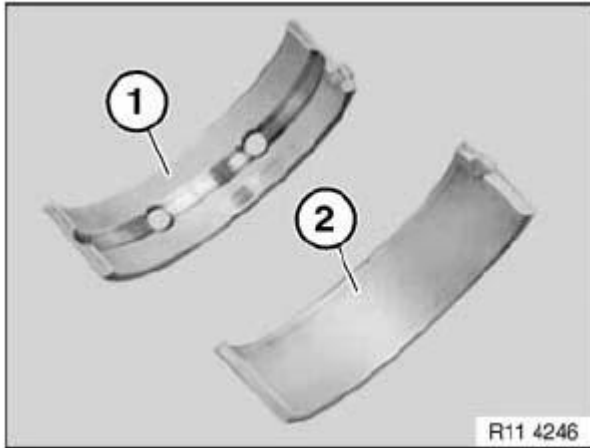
Identifying Bearing Shell With And Without Lubricant Groove
